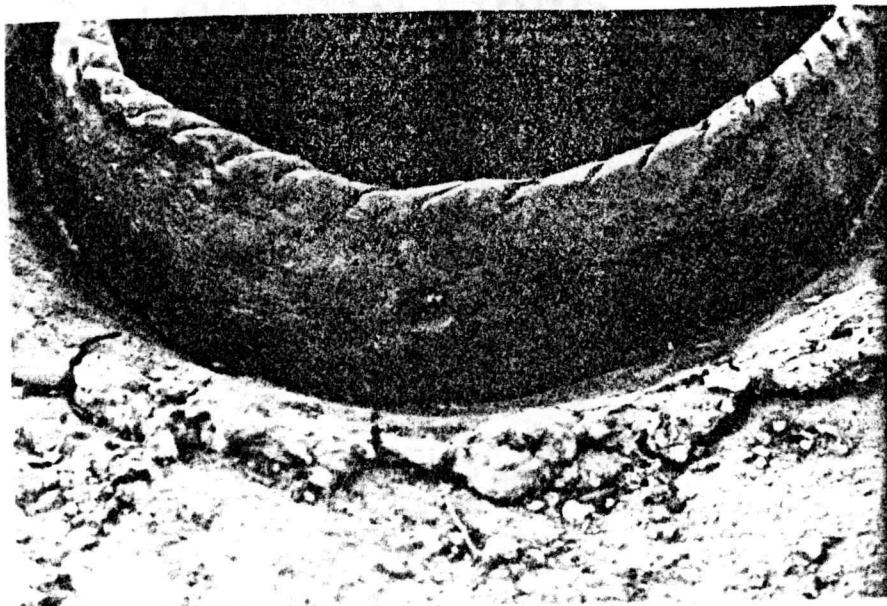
Detail, Showing Neck and Rim of Pot Formed Above Ground Mould. Note Rim Edge and Handle Hole.
